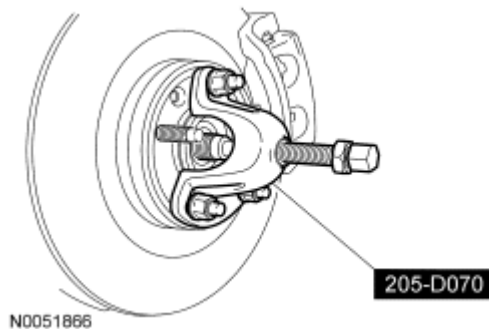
Separating RH Halfshaft From Hub Using Special Tool (205-D070)
